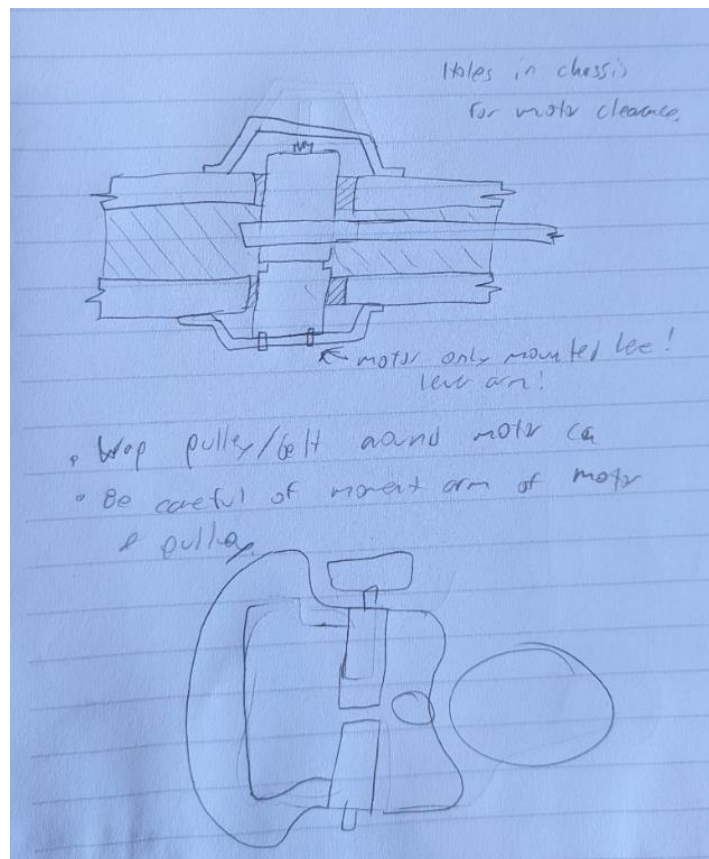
Top: Motor installation Concept. Bottom: Buffer Zone Design
